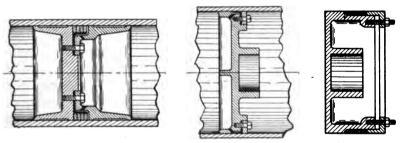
Section of Piston, Showing Hale Hemp Packing in Place
